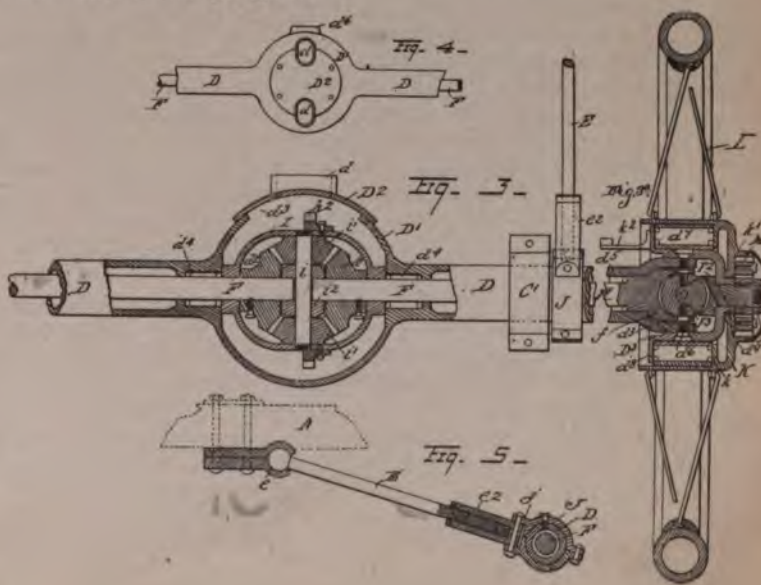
is a side view. Fig. 3 is a horizontal sectional view of the axle casing and differential gear, and Fig. 3A is a vertical sectional view of one of the front wheels and its connection to the axle and casing. Figs. 4, 5, 6 and 7 show various parts in detail.
